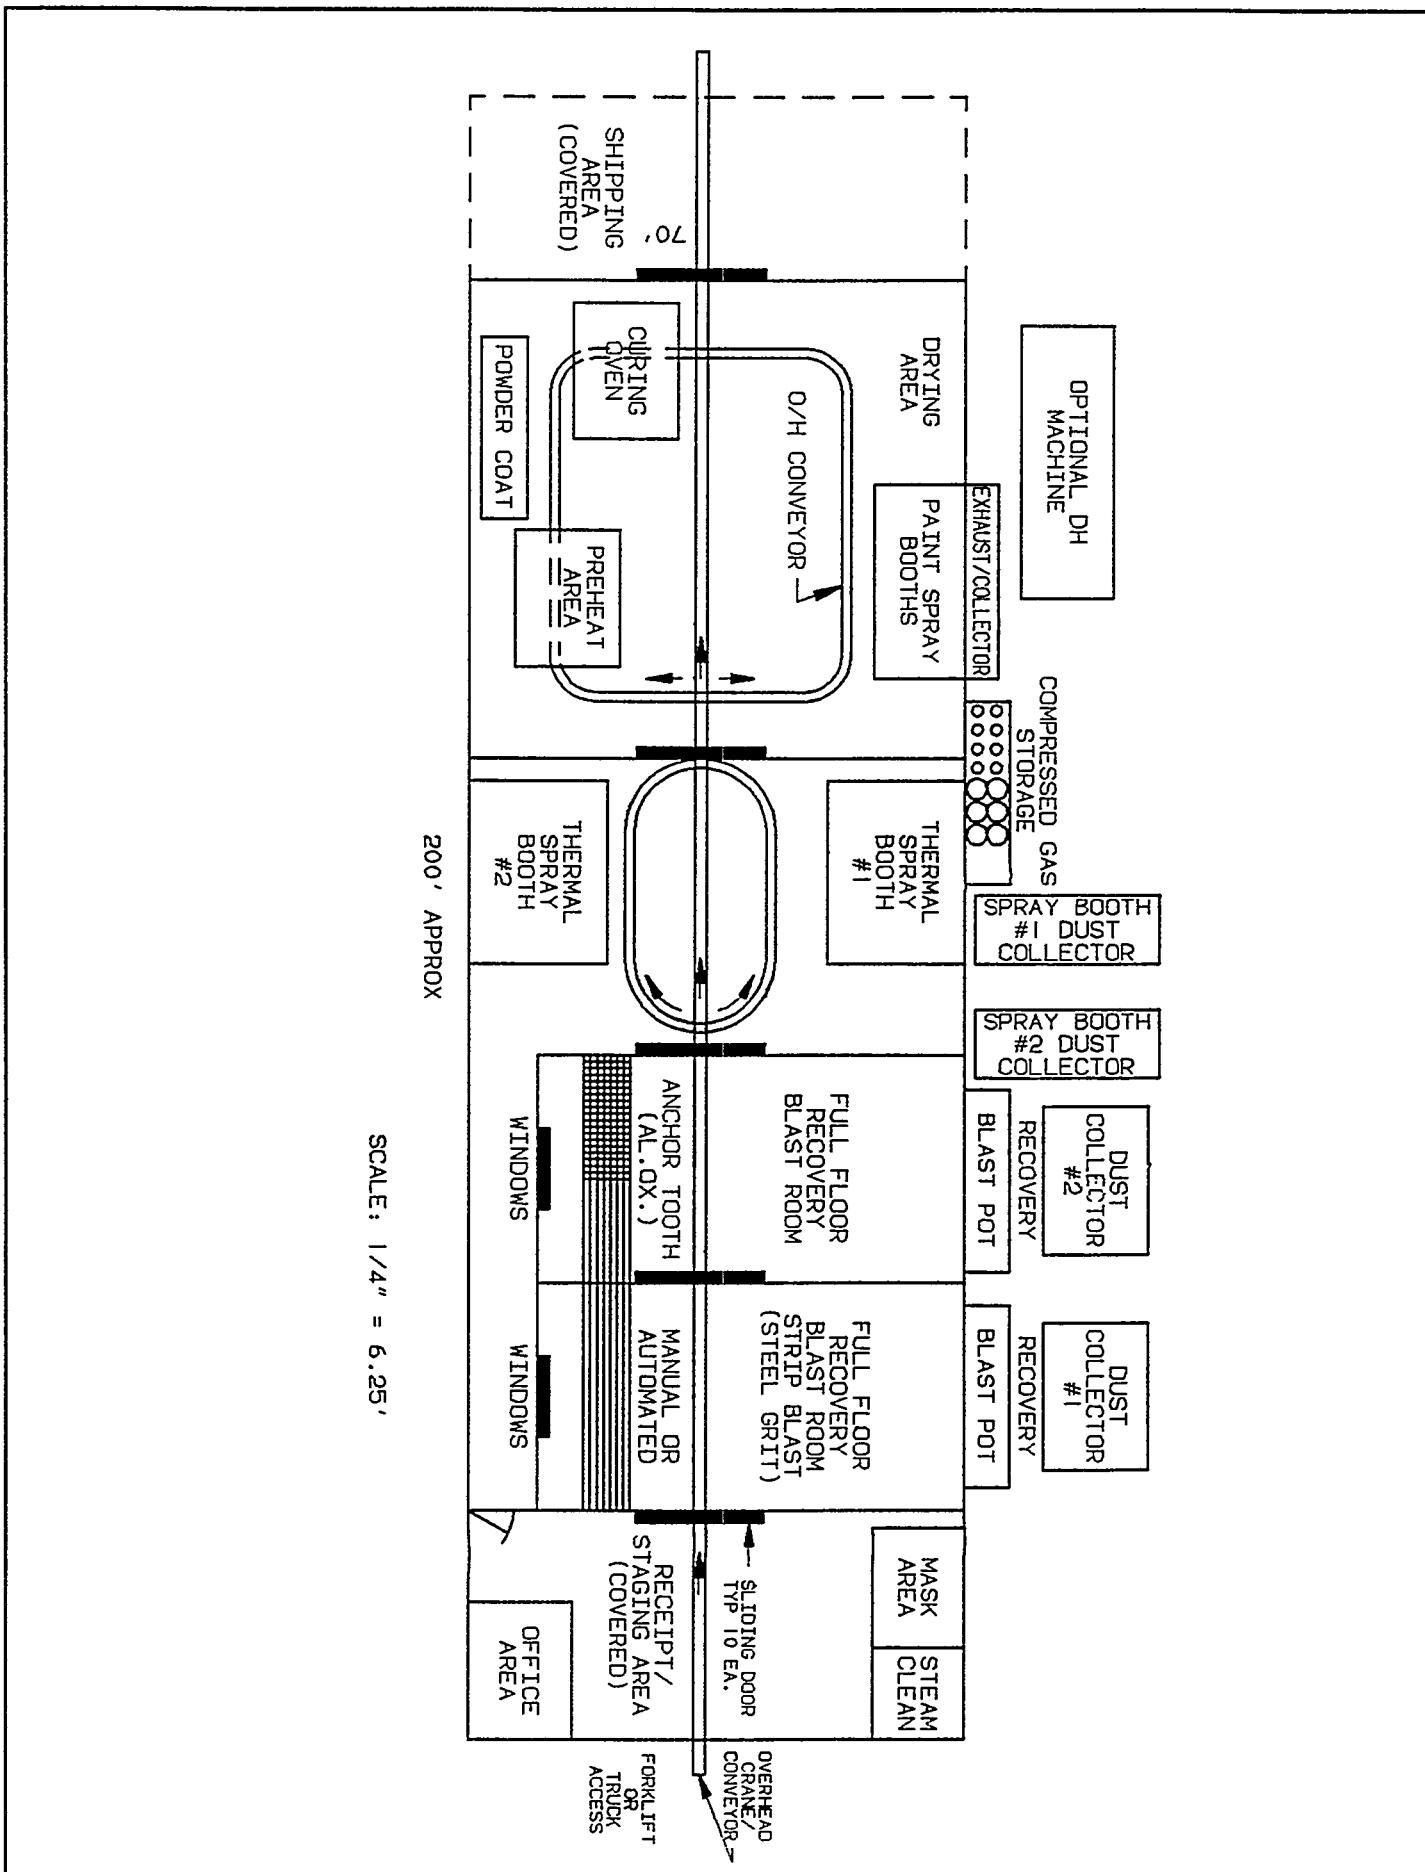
Proposed "Ideal" Thermal Spray Facility Floor Plan
